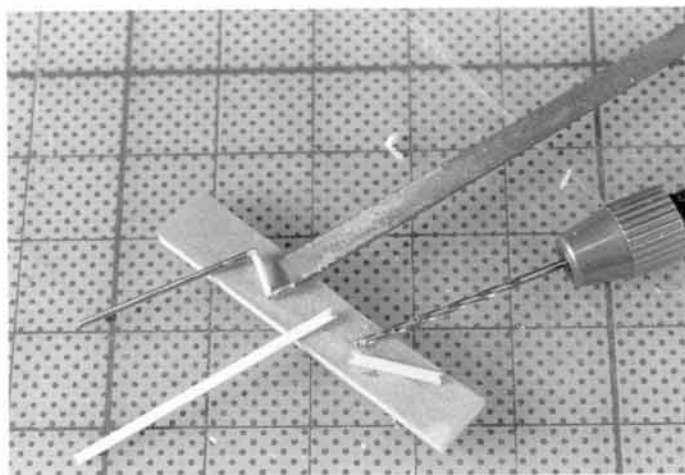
Making a large crank handle is as easy as it appears. The trick is to drill into the ends of the arm so that the brass wire will seat into the plastic, forming a good strong bond.
